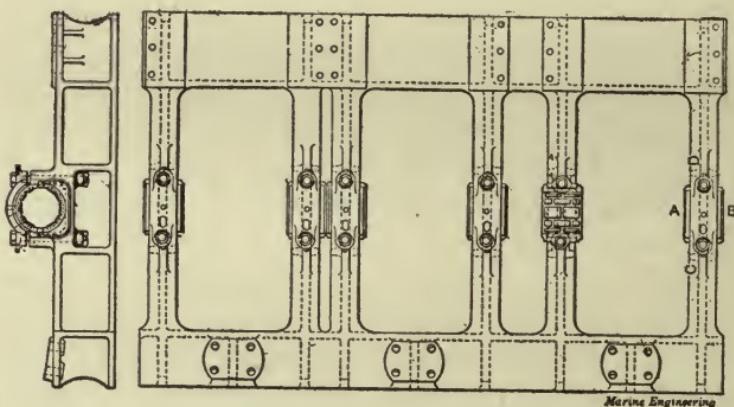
BEDPLATE FOR TRIPLE-EXPANSION ENGINE IN ONE CASTING
